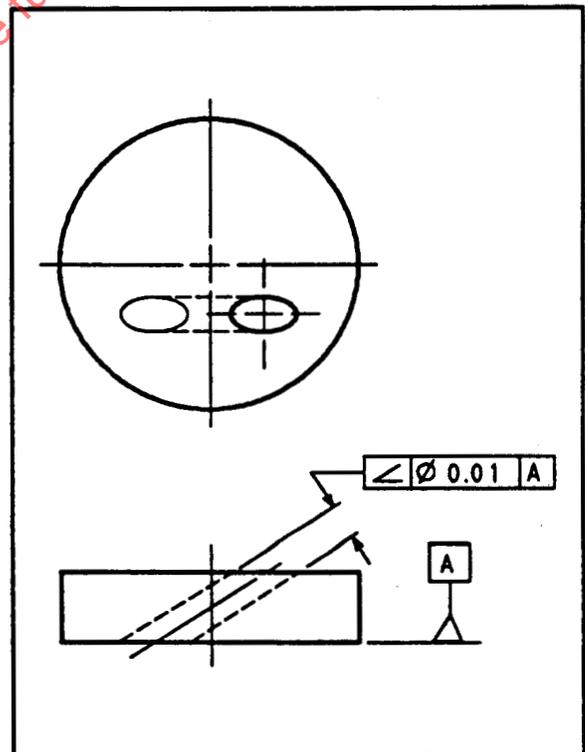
CYLINDRICAL ANGULARITY OF AN AXIS; PRIMARY DATUM PLANE; NO SECONDARY DATUM SPECIFIED
